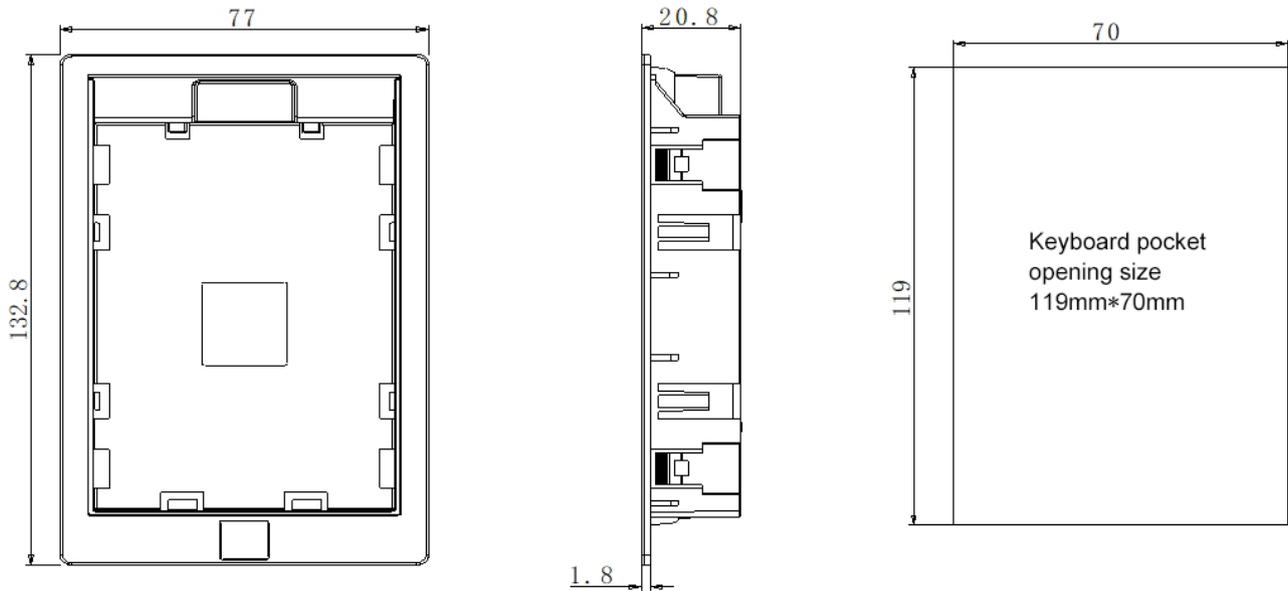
Boundary Dimensions and Bore Dimensions of External Dual-line Keyboard Pocket
